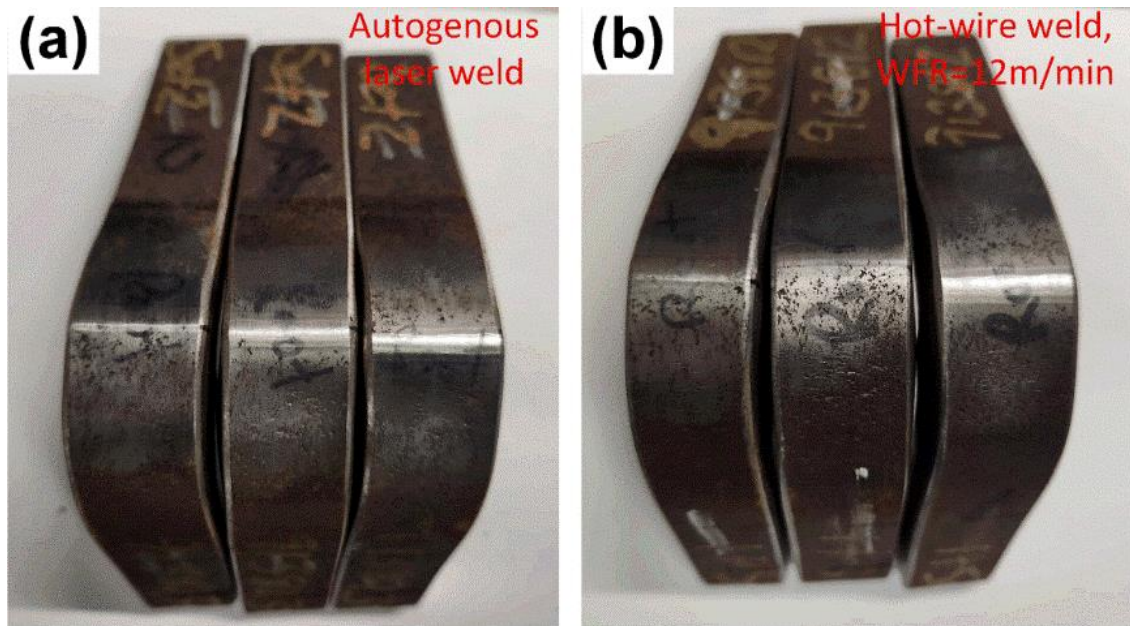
Root surfaces of the samples after bend tests, with the root pass of: (a) autogenous laser weld; (b) hot-wire laser weld with a WFR of 12 m/min.
